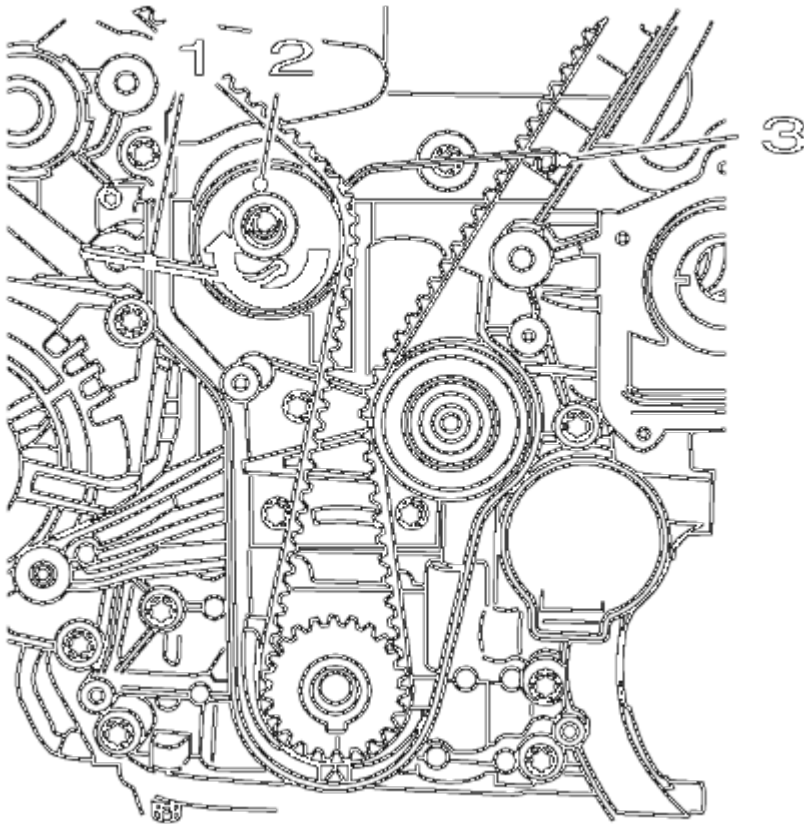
Timing Belt Tension Roller, Allen Key And Special Tool
